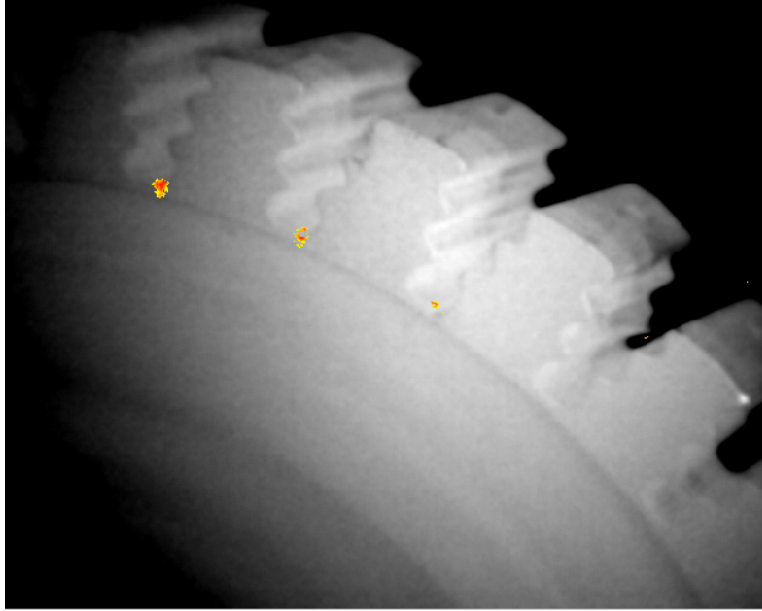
Auxiliary power unit disk with DRA revealing three TMF cracks; isometric viewing angle
